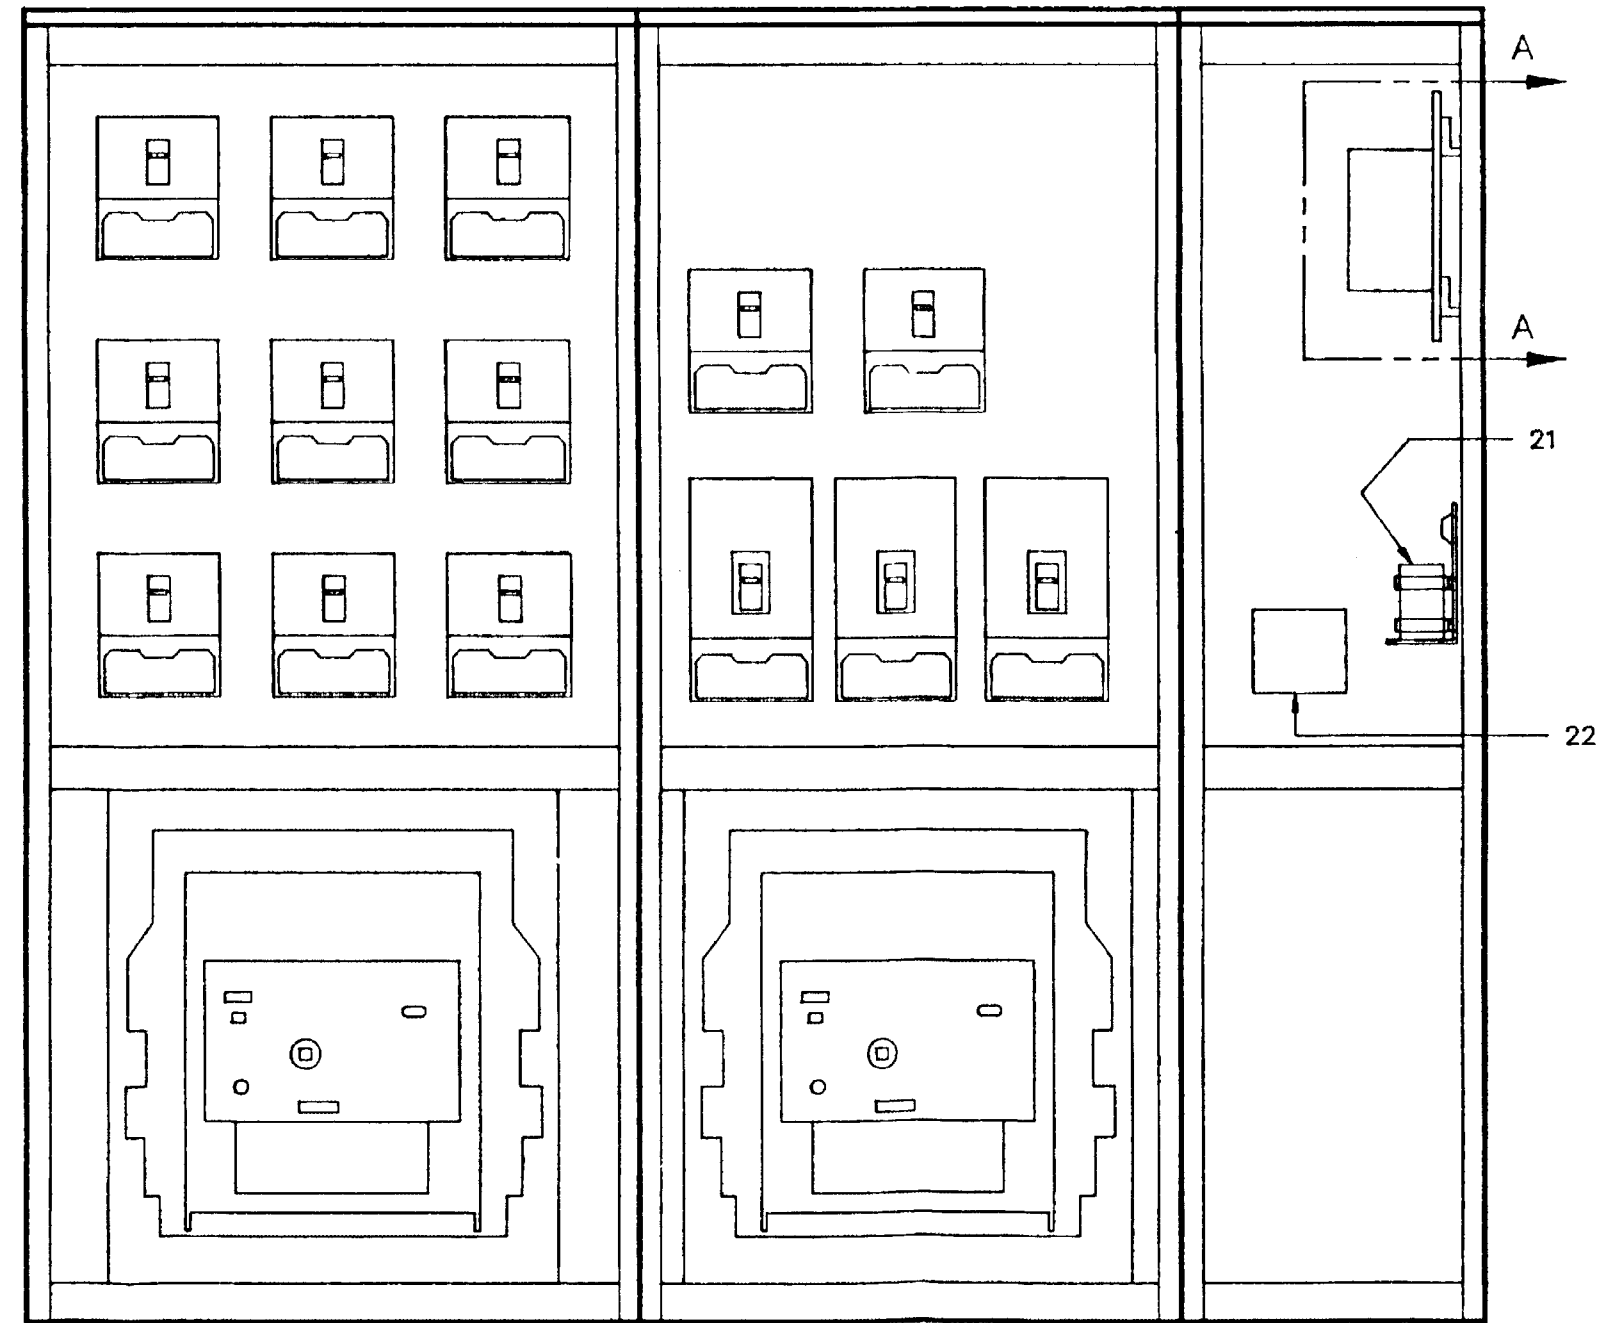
3SA Switchboard Assembly (Sheet 1 of 3)
